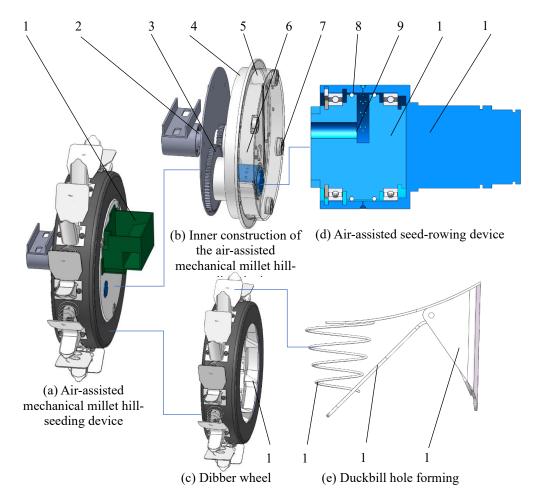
Structure schematic diagram of the air-assisted mechanical foxtail millet hill-seeding device: (1) seed box, (2) revolving shaft, (3) transmission gear, (4) inner disc, (5) outer disc, (6) seed filling area, (7) idler wheel, (8) sealing ring, (9) air chamber, (10) stator, (11) rotor, (12) seed receiving box, (13) return spring, (14) pressure plate, and (15) duckbill upper jaw.
